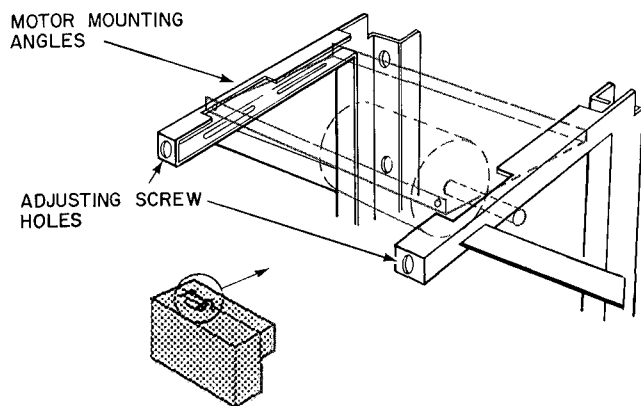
028 and 034 Horizontal Fan Motor Mounting Angles
